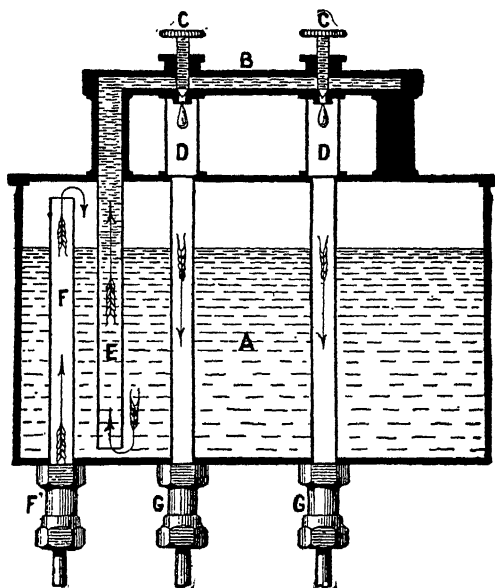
TYPICAL FORCE-FEED LUBRICATOR, OPERATING BY AIR OR GAS PRESSURE, INSTEAD OF A PUMP.
